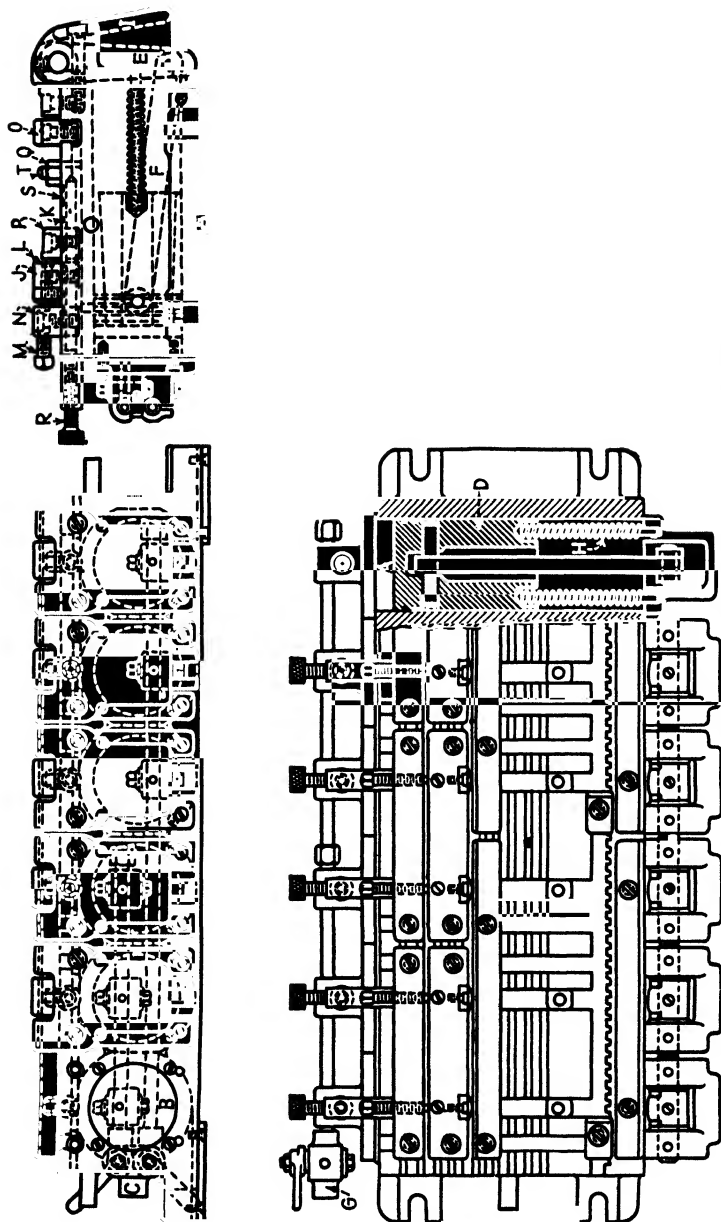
Details of the same fixture as shown in Fig. 90.
